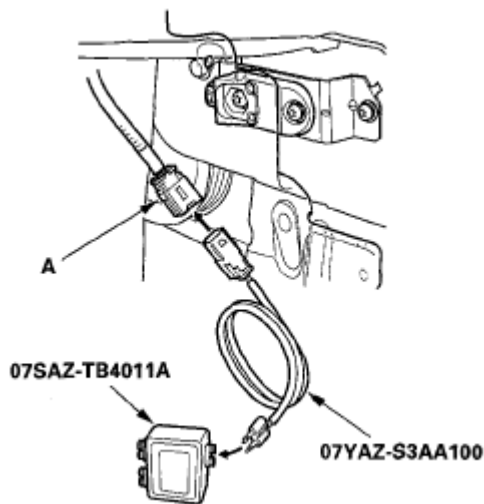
Identifying Engine Compartment Wire Harness 2P Connector
